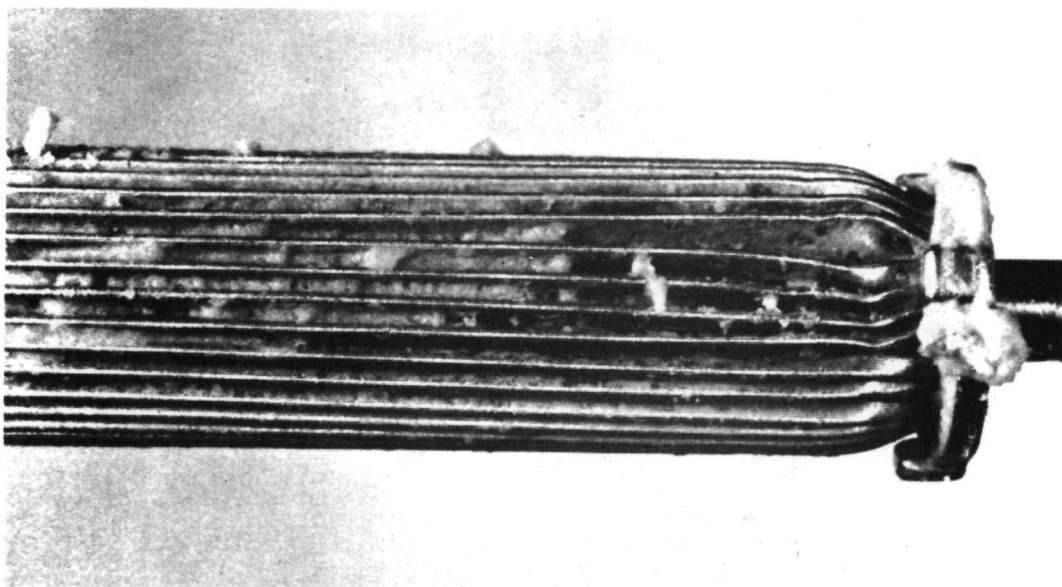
CONTAMINATED FILTER S/N 24 (SOME MATERIAL REMOVED)
